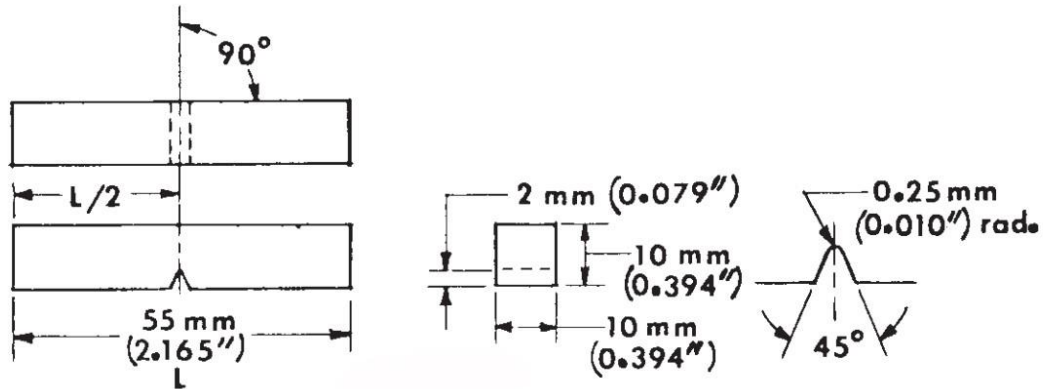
Dimensions of the Charpy V-notch impact bars prior to testing.
